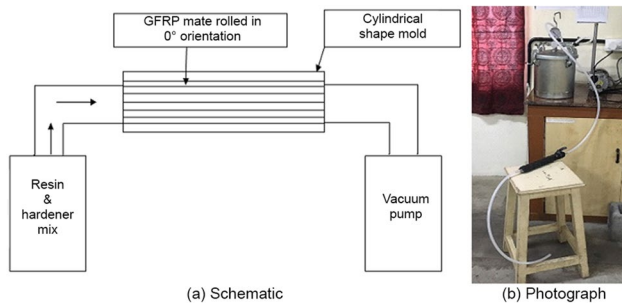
VARTM (vacuum-assisted resin transfer mold) method setup
